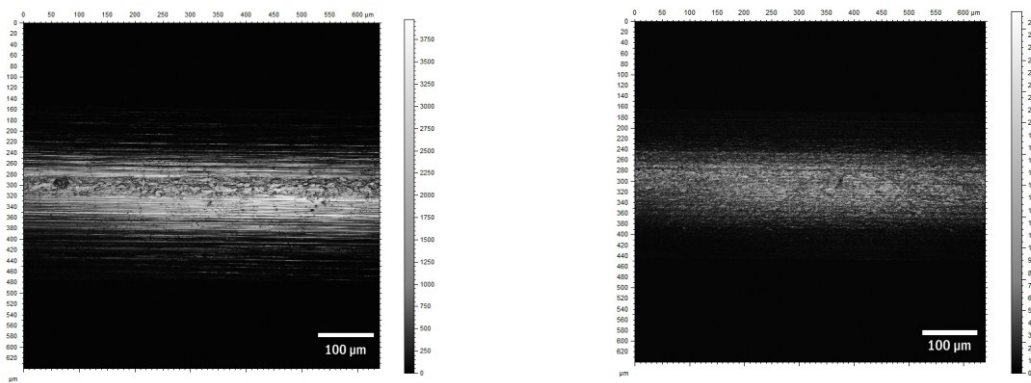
Thread crests of die A6. (Left) New thread. (Right) Used thread.
